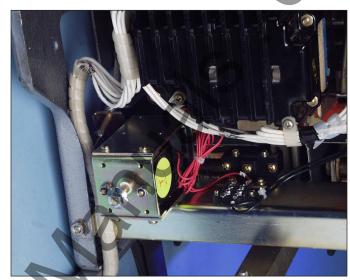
Overview – DTA Assembly Installed in the Breaker
